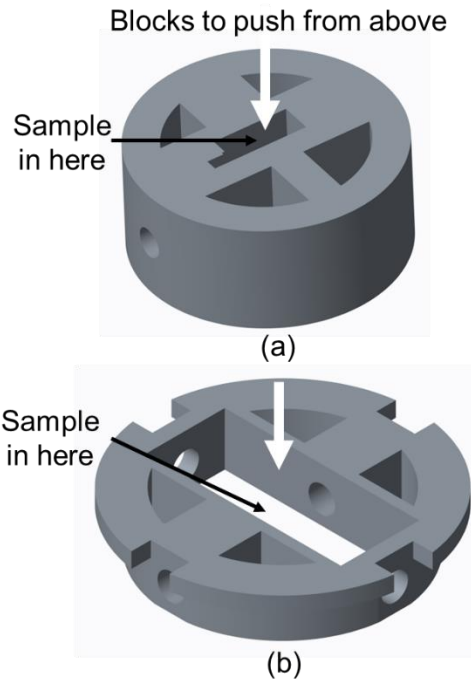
Fixtures to grind for recast layer analysis, ensuring flat and even polishing for small samples. (a) Used for 0.3 mm holes in 1.4 mm thick CMSX-4, (b) used for 1.9 mm holes in 20 mm thick Inconel 718.
